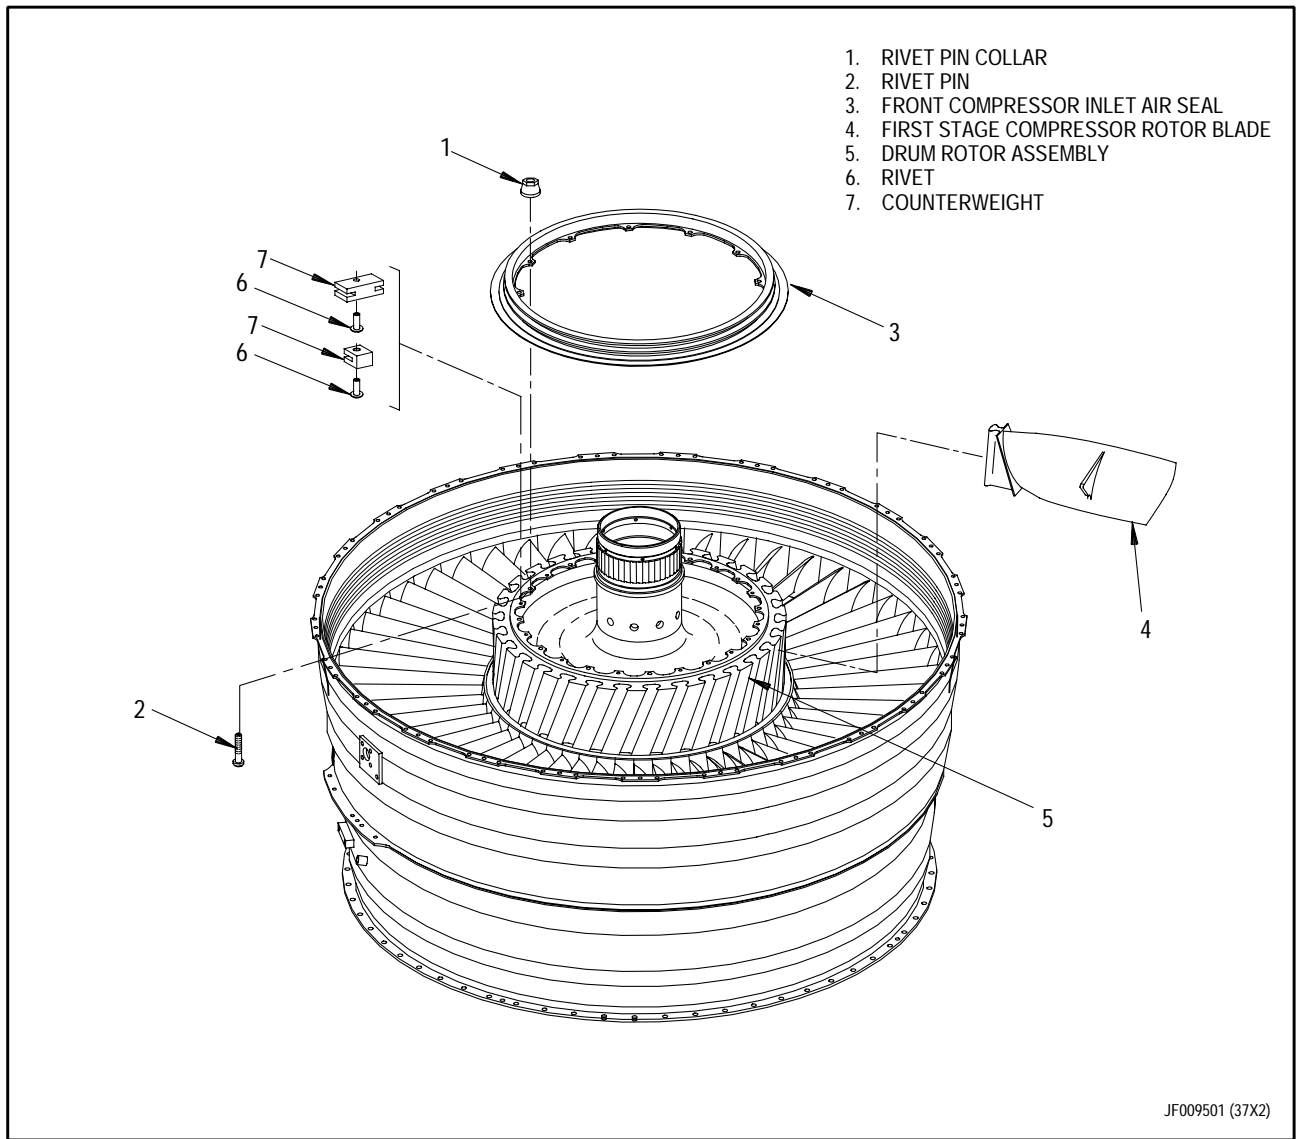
Front Compressor Inlet Air Seal and First Stage Compressor Rotor Blades - Removal
